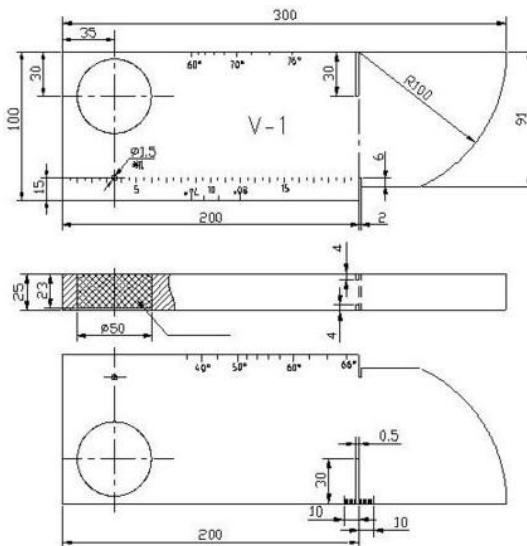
Technical Drawing of SRB Type IIW (Admin, 2019)
